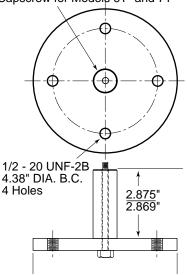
Assembly fixture dimensions for 6" motor; stickup is motor height. Use 1/4–20 stud or capscrew to hold shaft of 6T- and 7T- models only. When using cap screw, it must be long enough to pass through fixture and clamp shaft tight against fixture post.
